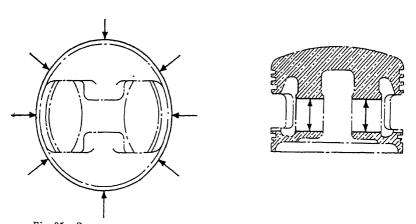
Showing points to check piston skirt and gudgeon fin bores.
